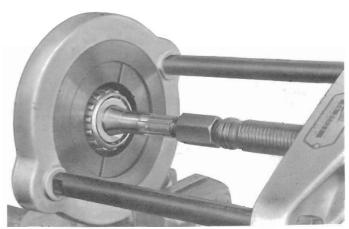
Using Churchill press and adaptors \$4221A-4 to remove pinion head bearing
